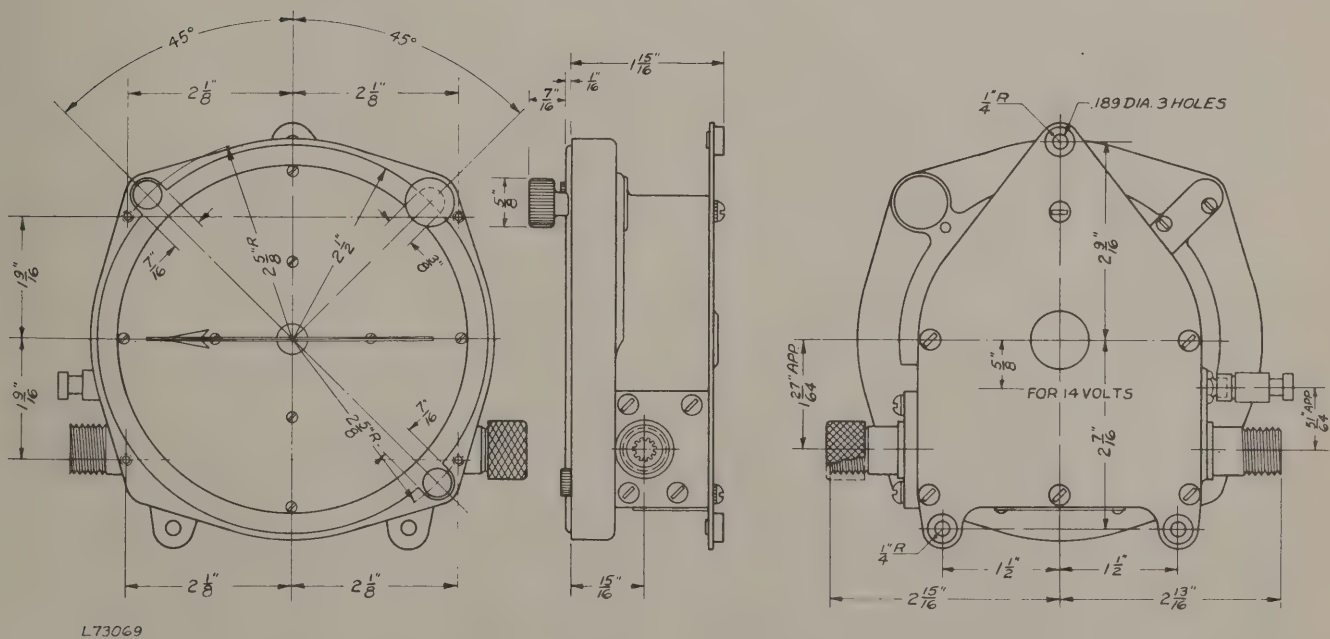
Type MN-22A Azimuth Indicator, Outline and Mounting Dimensions
